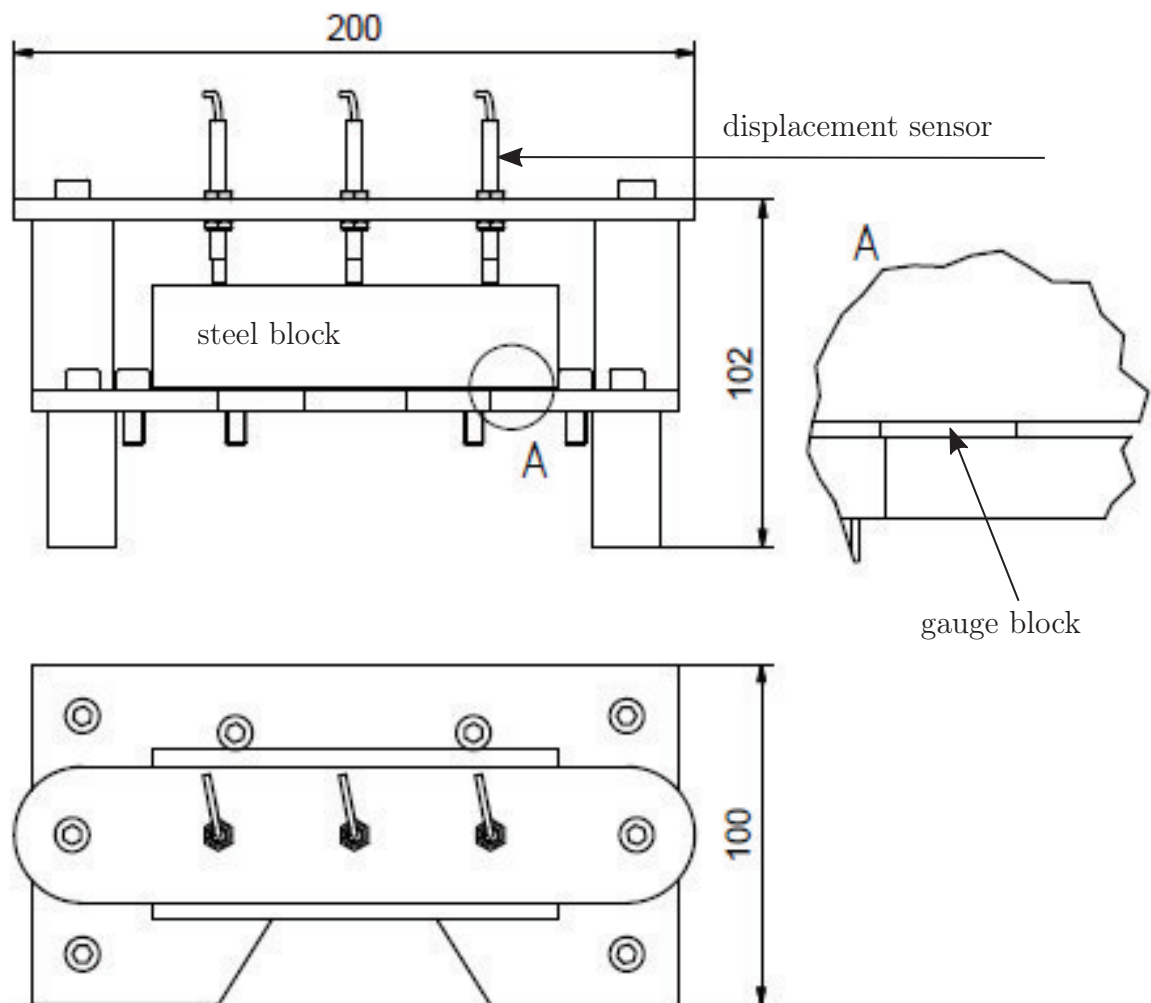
Schematic figure of the gauge block calibration tool.
